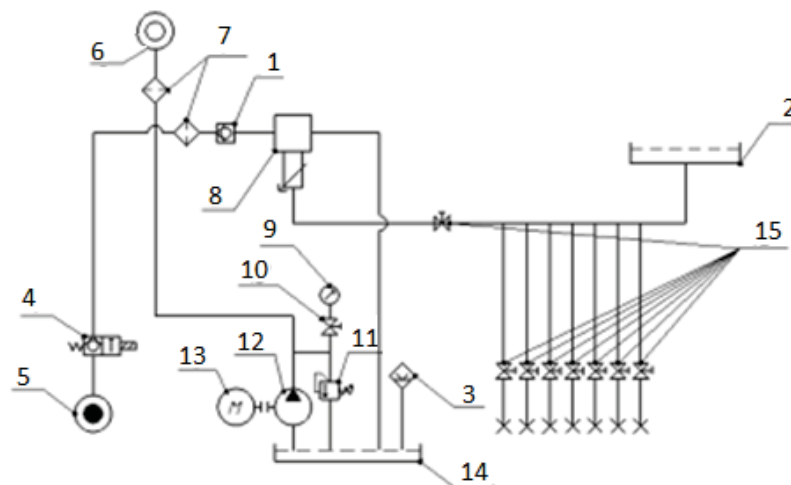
Diagram, of centralized supply of release lubricant to molds: 1 - check valve; 2 - hydraulic tank; 3 - level sensor; 4 - on-off distributor; 5 - shop line; 6 - lubricating device; 7 - filter; 8 - dispenser; 9 - pressure gauge; 10 - valve; 11 - safety valve; 12 - hydraulic pump; 13 - electric motor; 14 - intermediate tank; 15 - emergency valve.
